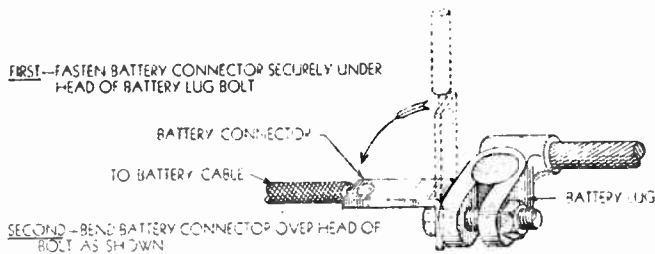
Method of Attaching Battery Cable Connectors to Battery Lug Bolts.
